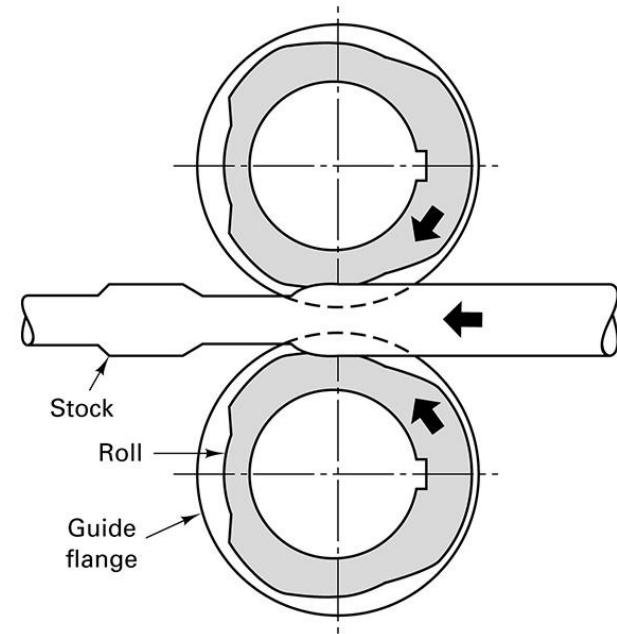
Schematic of the roll-forging process showing the two shaped rolls and the stock being formed. (Courtesy of Forging Industry Association, Cleveland, OH.)
